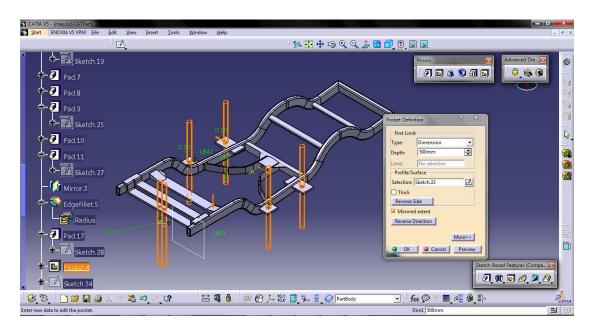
Used Pocket Tool For The Side Rails In Chassis
